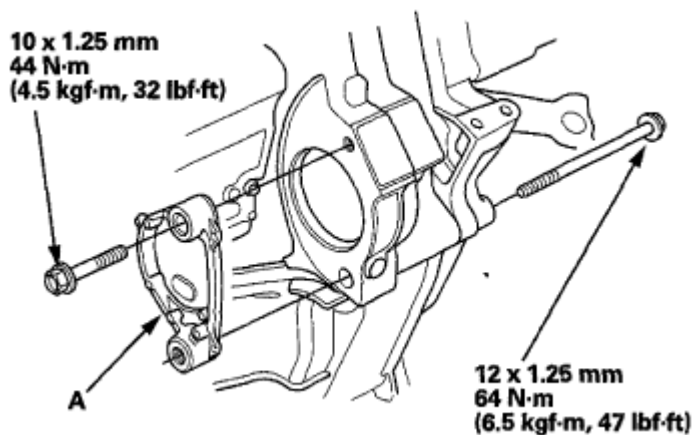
Identifying Block Cover And Bolts With Torque Specifications
